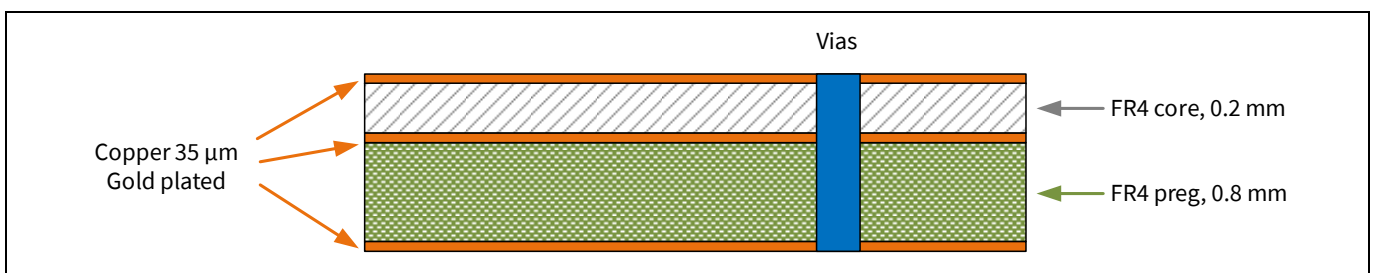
PCB stack information for the evaluation board with PCB marking M11118
